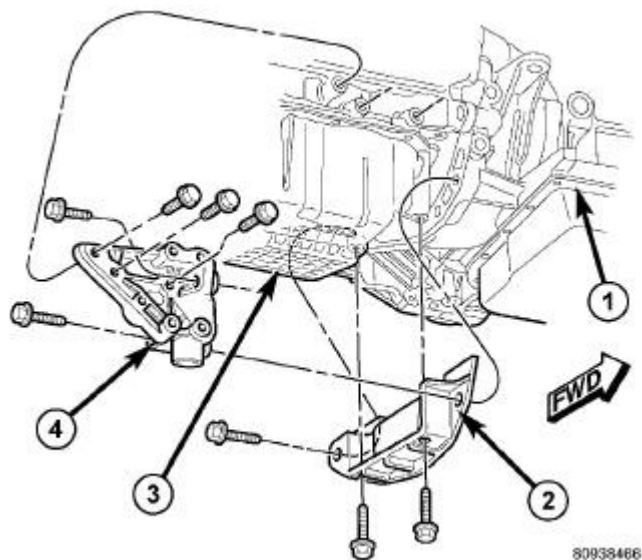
Structural Collar and Bending Strut - (Automatic Transaxle Equipped)
